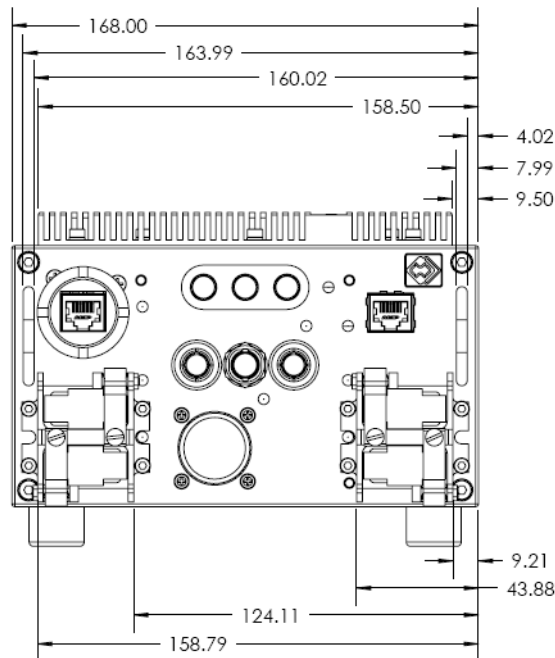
HG-TH Controller dimensions, front (in mm)
